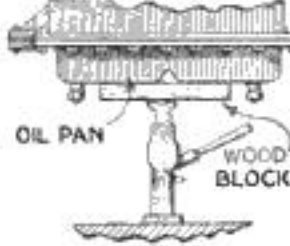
How a jack can be used to aid in removing or replacing the oil pan of your auto engine
